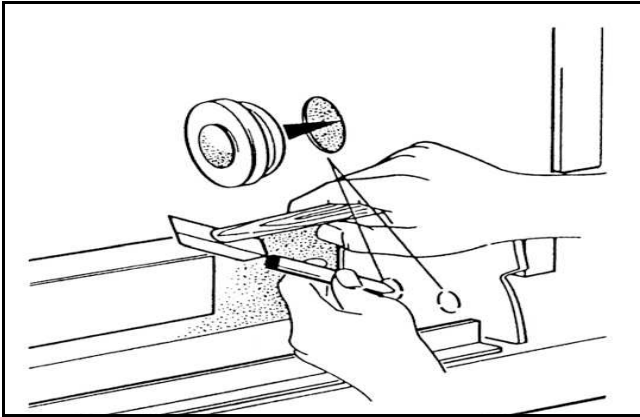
Pierce the pre-cut openings for the auxiliary heater with a sharp tool such as a screwdriver. Remove sheet metal parts from the connection compartment. Press the grommets supplied into the perforations in the partition panel. The thicker side should be towards the air mixing space.
